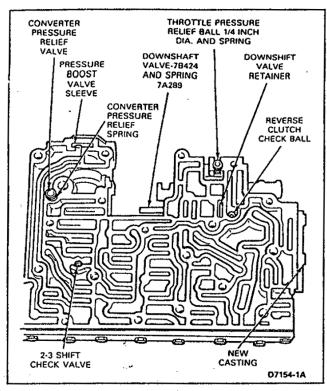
Downshift Valve and Spring, Converter Pressure Relief Valve, Throttle Pressure Relief Valve Check Ball, and 2-3 Shift Check Valve Locations
